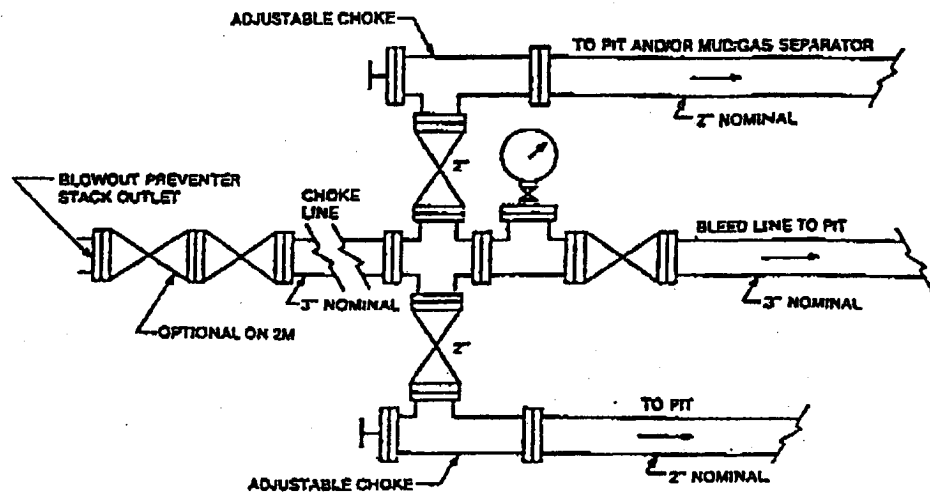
Typical choke manifold assembly for ZM and 3M rated working pressure service — surface installation.
